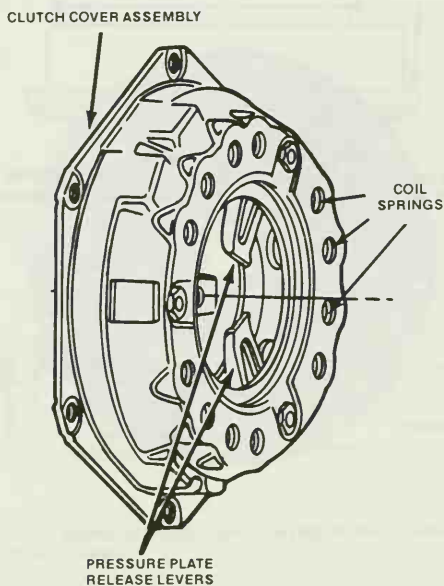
This pressure plate uses 12 coil springs. (American Motors Corporation)
